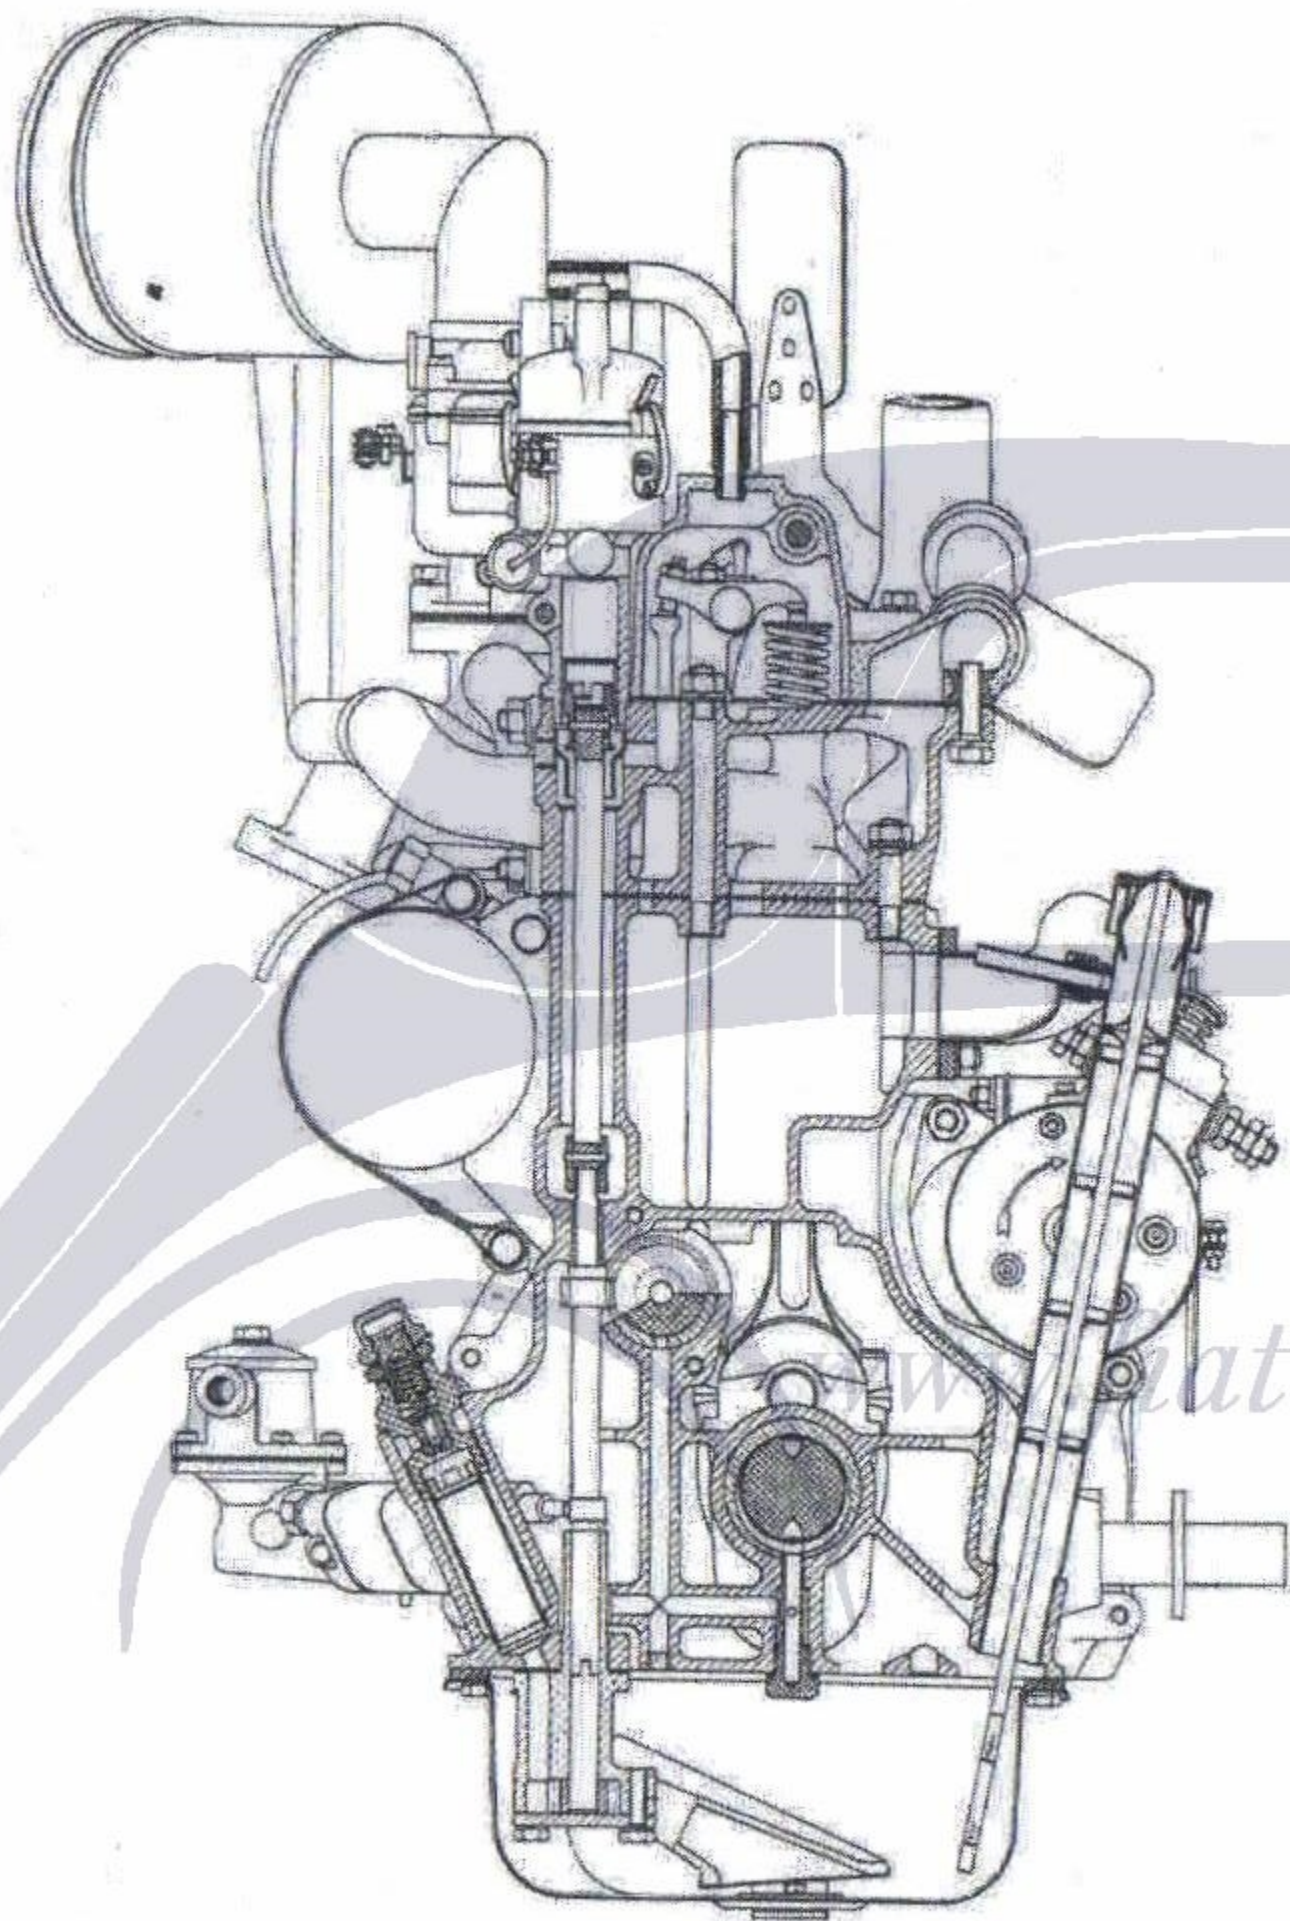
Front cross section of engine Mod. 500 B on distributor and oil pump drive.
